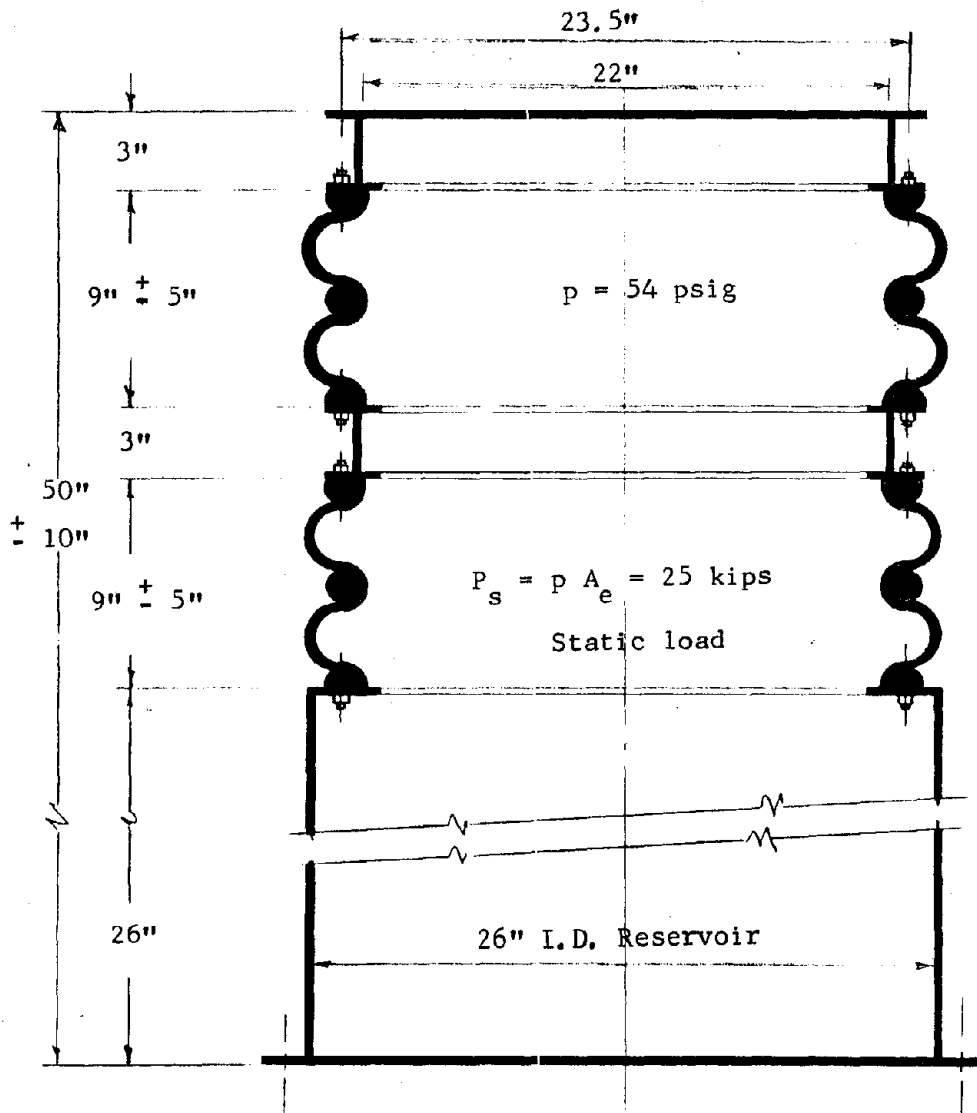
AIR BELLOWS SHOCK ASSEMBLY
